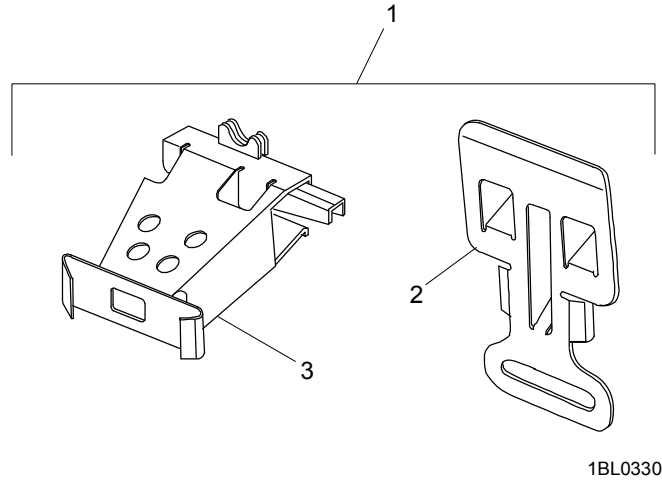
Component of End Item, Adapter Assembly, Ammo, PN 12976909
